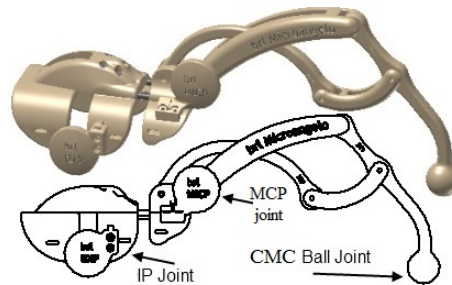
Thumb MCP joint mechanism showing ball joint and four bar mechanism
